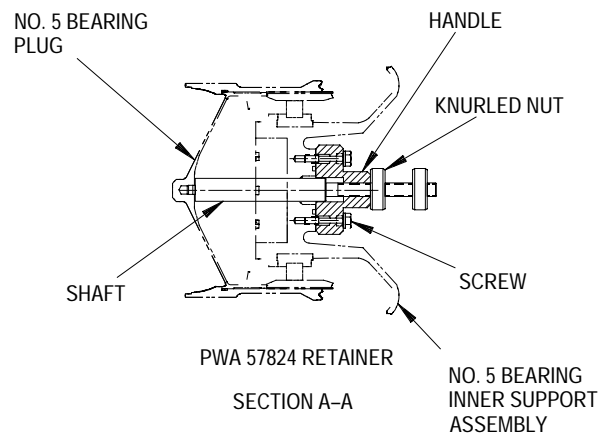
Fan Drive Turbine Module - Removal From Shipping Container (Sheet 1 of 4)
